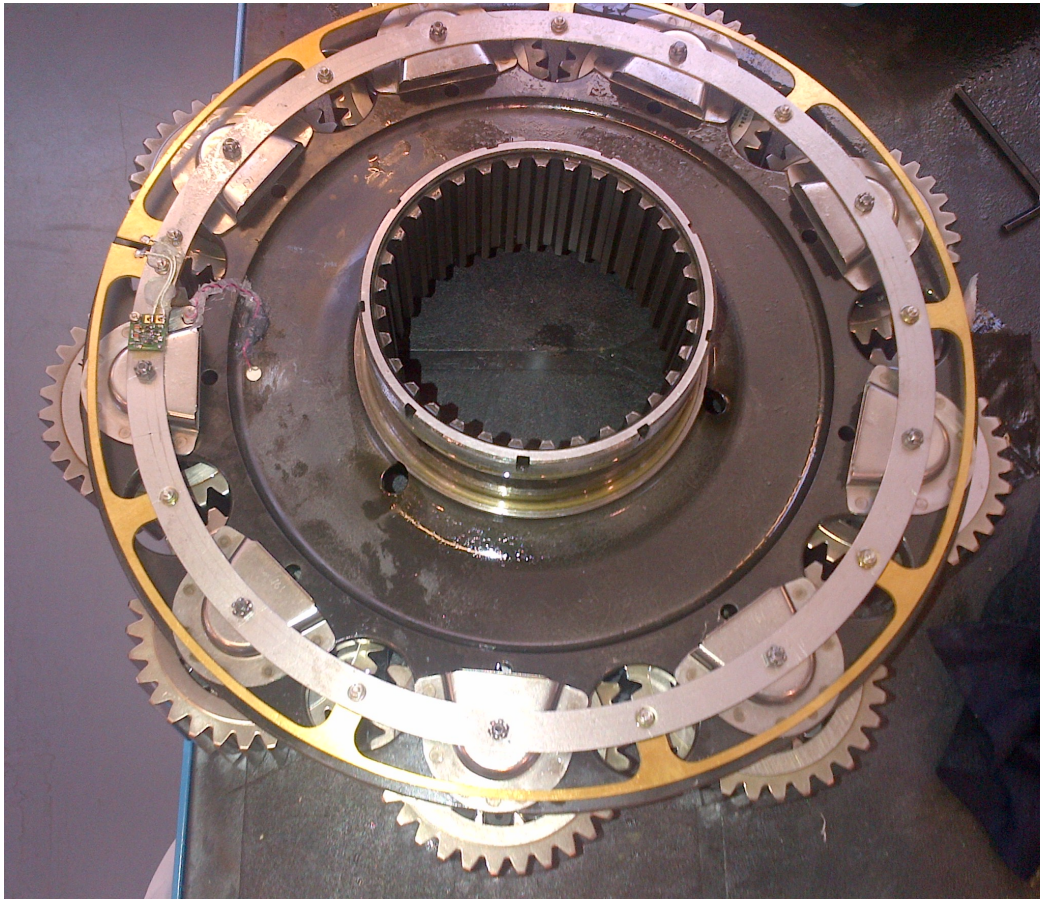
Assembled sensor, rotating coil and mount on planet carrier
